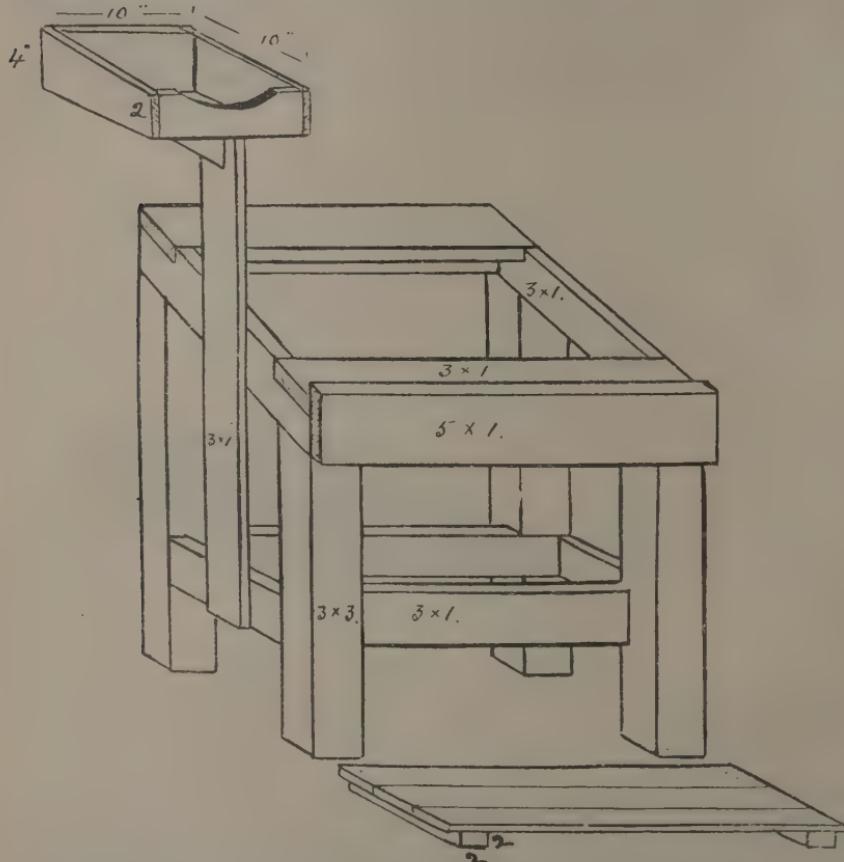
(Fig. 6).—FRUIT PACKING BENCH AND SPRING BOARD.
